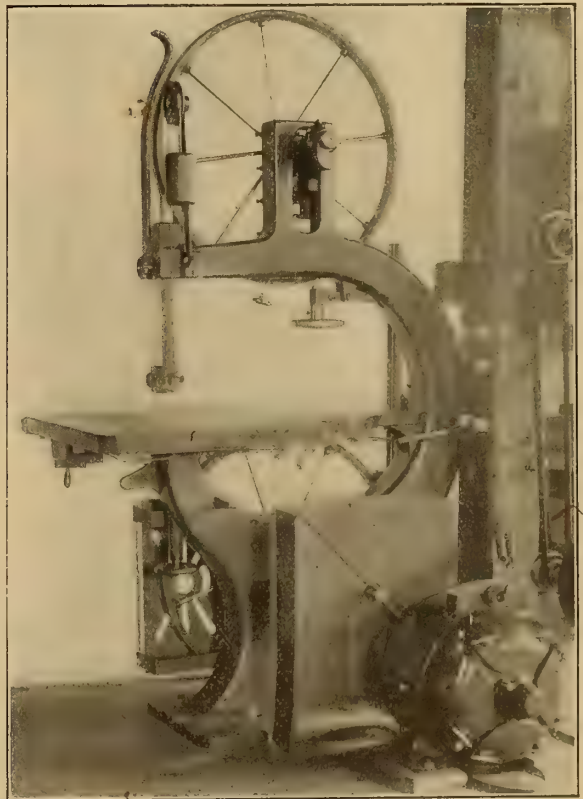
BAND SAW. S. A. WOODS MACHINE CO. GEARED 3:1 TO GENERAL ELECTRIC CO.'S CE4-3 H.P.-1200-500-FORM A. C. W. MOTOR.
